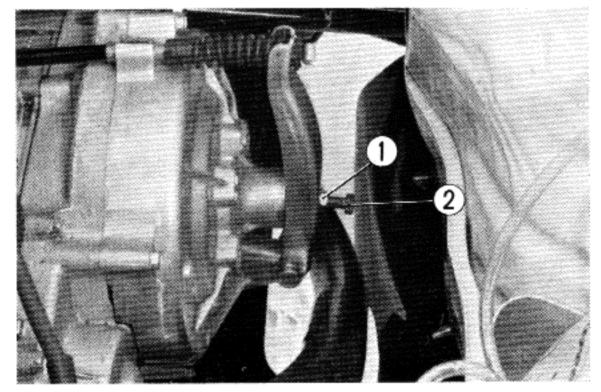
① Lock Nut ② Adjusting Bolt
